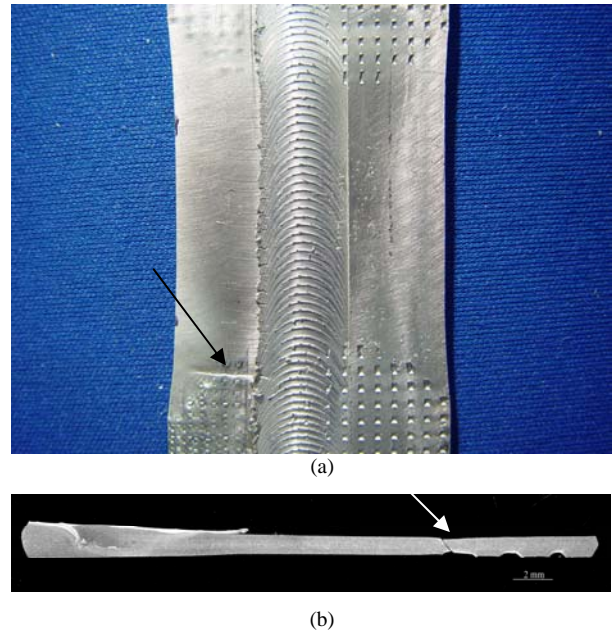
An illustration of the failure observed in the grip region of the 5182 welded alloy uniaxial specimens. Image (a) is a longitudinal specimen and (b) is a cross-section of a transverse specimen.
